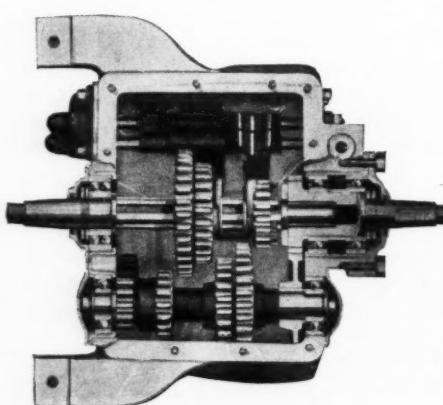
View of gearset used in 1915 Jeffery Chesterfield six
